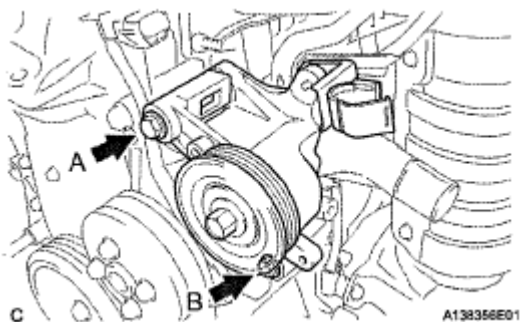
Locating V-Ribbed Belt Tensioner With Bolts
